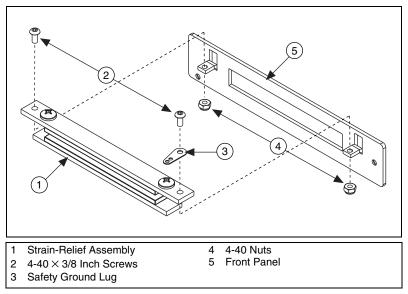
Connecting the Strain-Relief Assembly and Front Panel
